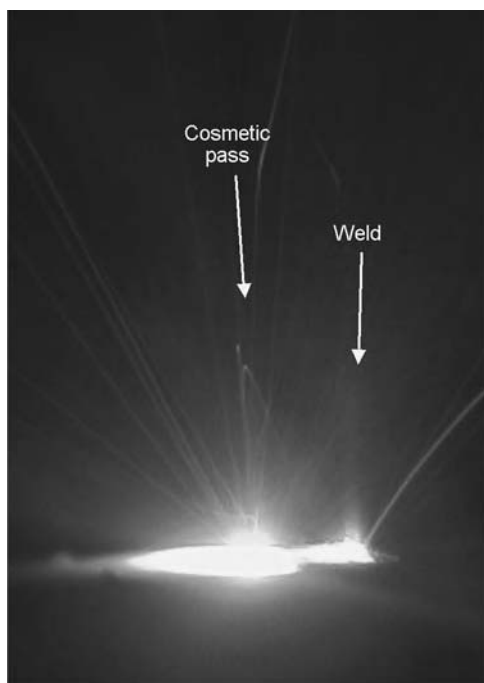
Weld and cosmetic pass. Courtesy of PTR-Precision Technologies, Inc.
